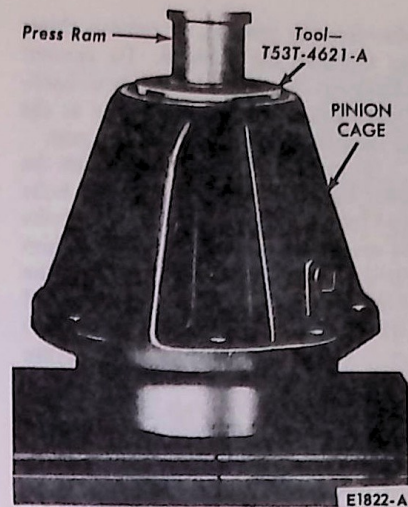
Installing Hypoid Pinion Front Bearing Cup
